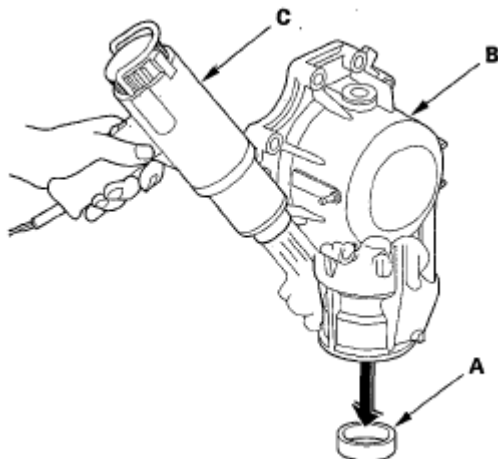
Identifying Press-Fitted Bearing Outer Race
